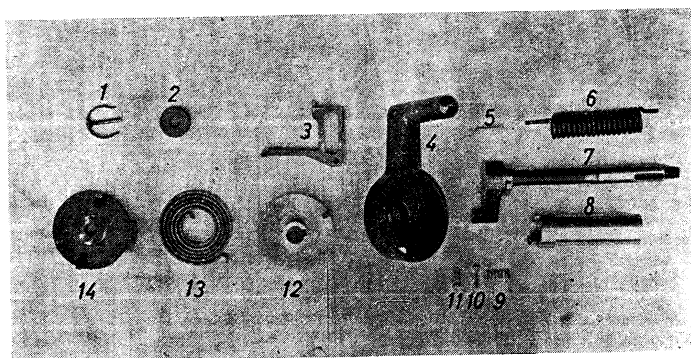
SEMIAUTOMATIC MECHANISM PARTS
